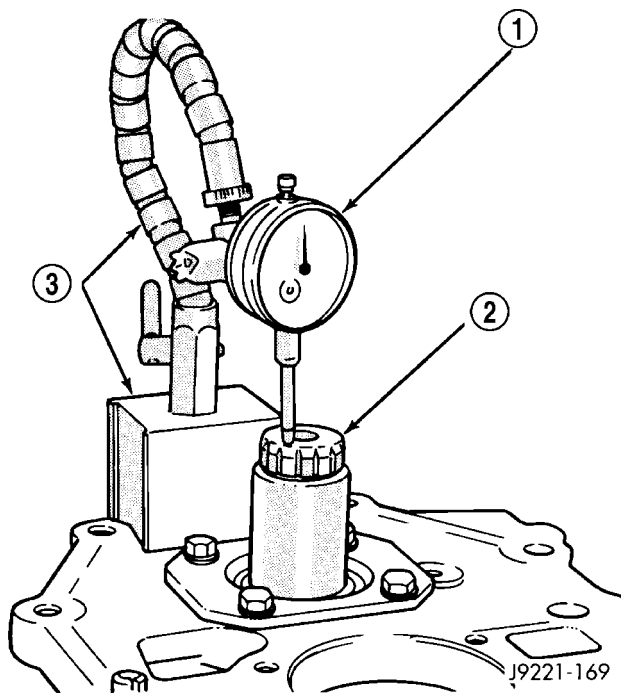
COUNTERSHAFT REAR BEARING PLATE
